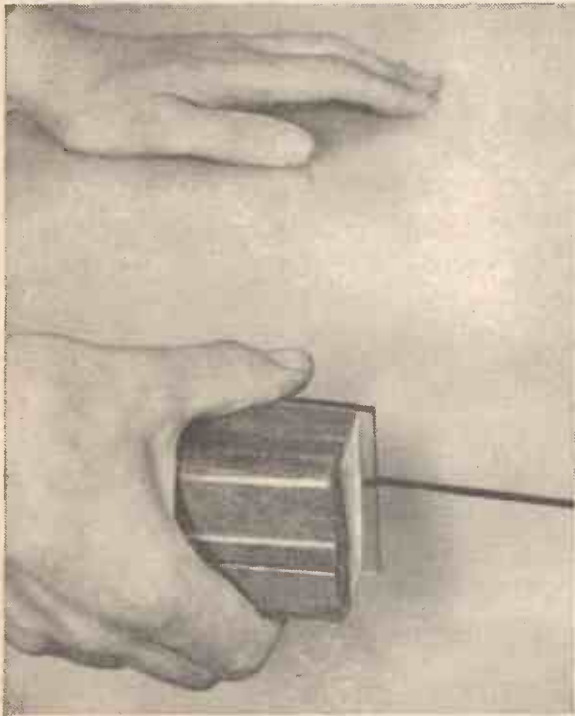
Polishing an edge by using a piece of glass stuck to a block of wood.
